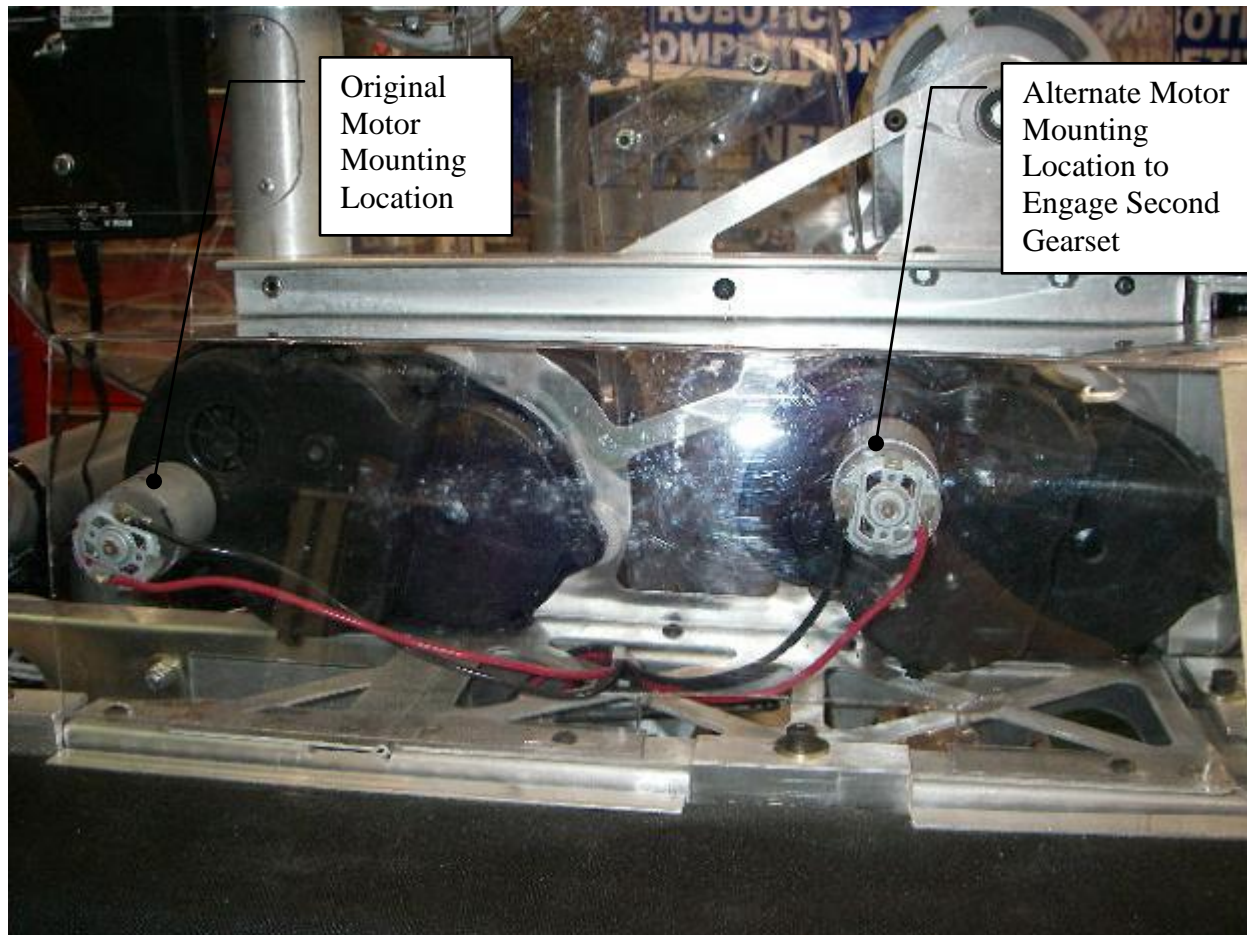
Alternate Motor Mounting Location – FRC67 (2009)
